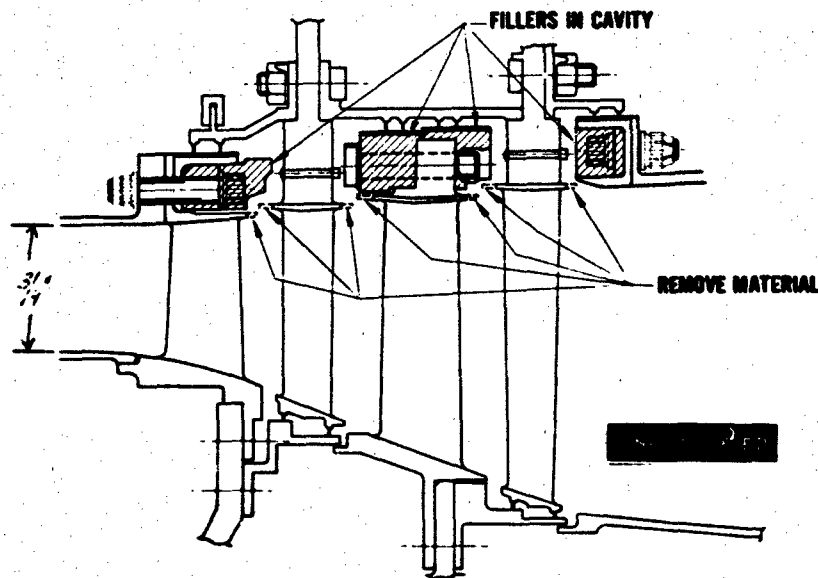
Test Configuration; Build II - Fillers Installed, Build III - Platforms Removed
